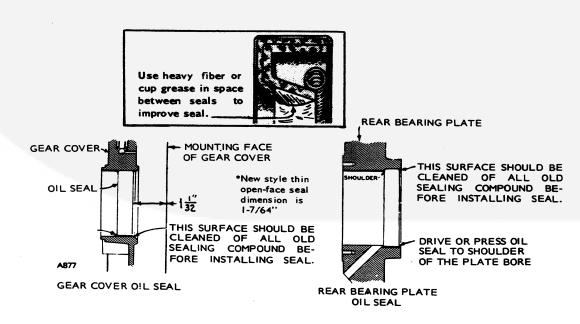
GEAR COVER AND REAR BEARING PLATE OIL SEALS
